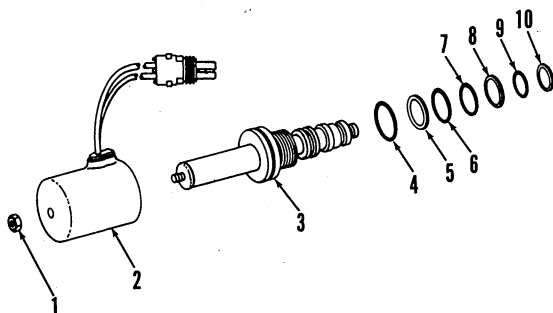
A—Exploded view of MFWD solenoid valve assembly used on late model tractors equipped with Power Shift transmission.
